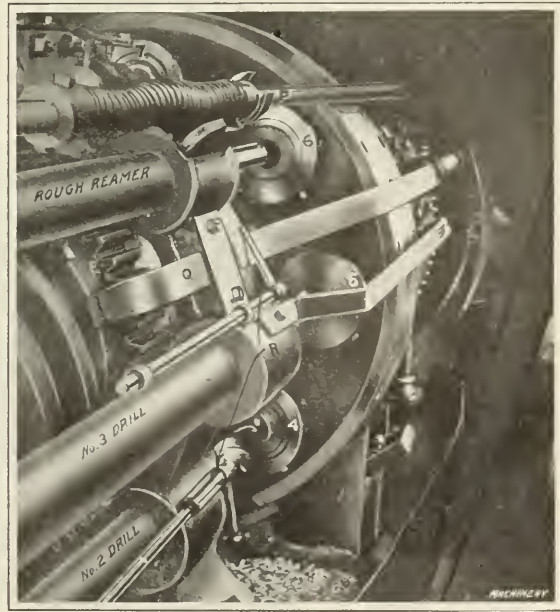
Close View of Machine shown in Fig. 1, illustrating Fourth, Fifth, Sixth and Seventh Operating Positions
